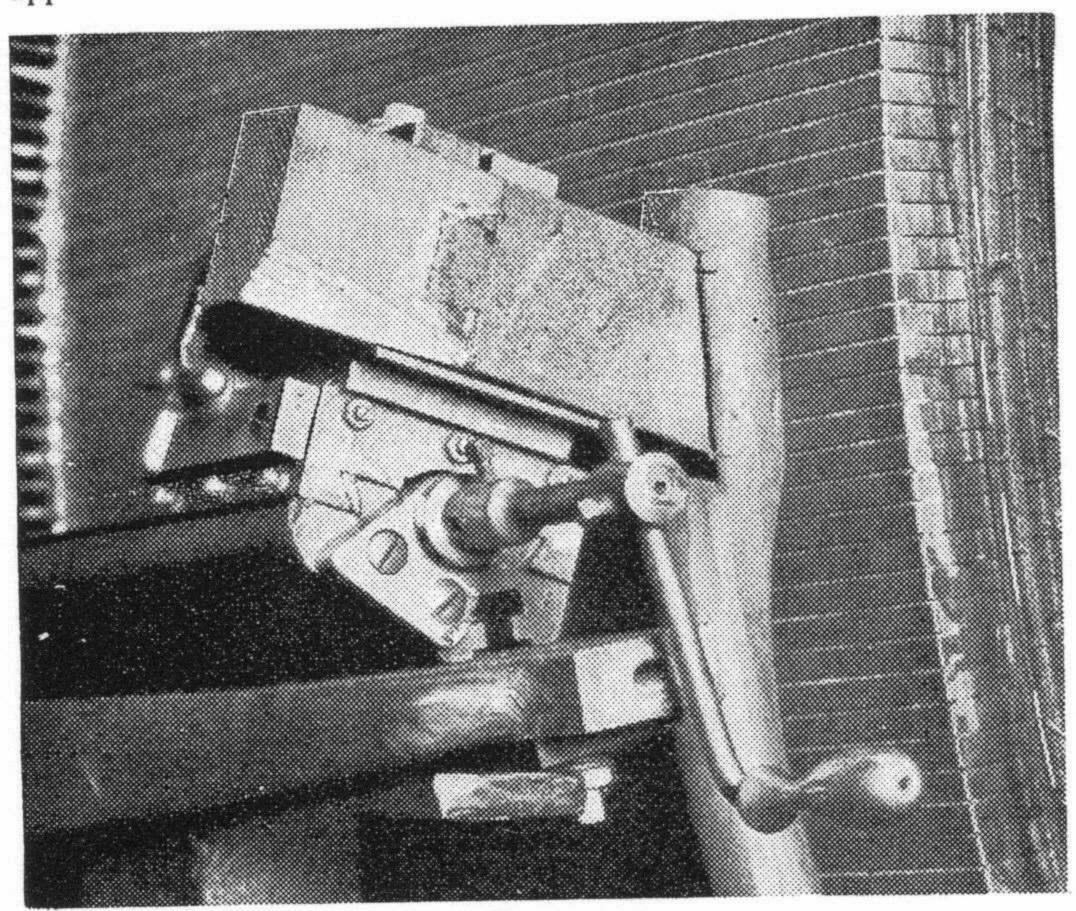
Grinding Device for Truing Commutators Showing Vacuum Hose for Removing Dust
